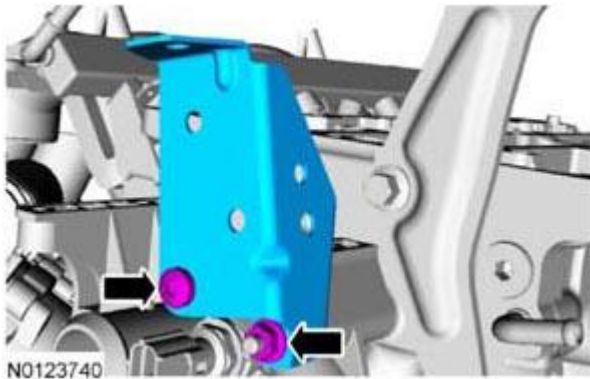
Locating Coolant Outlet Bracket Nut And Bolt
